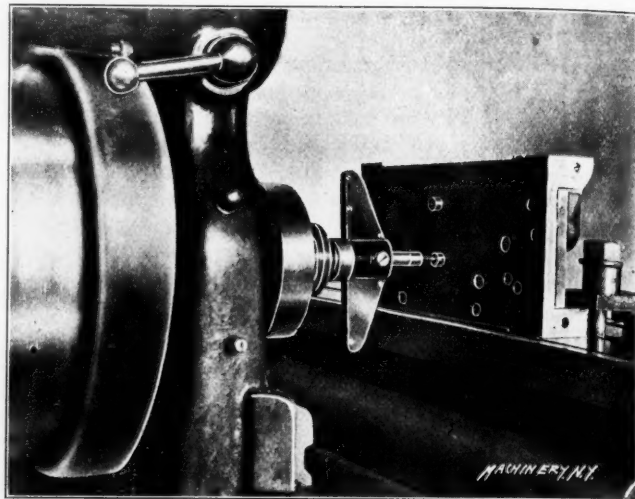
Use of the Indicator in the Horizontal Milling Machine.
